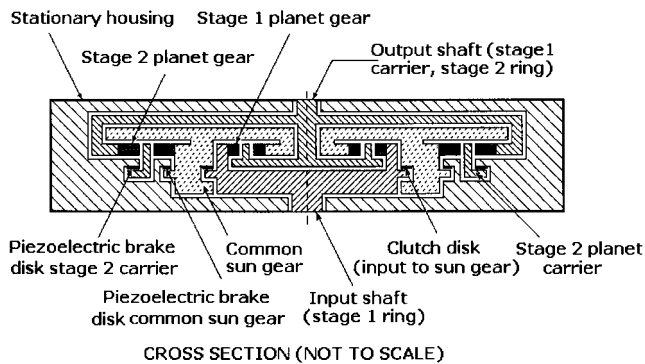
This Miniature Transmission could be regarded as a flat-tened version of a conventional three-speed automatic transmission. The components would be fabricated by micromachining.
